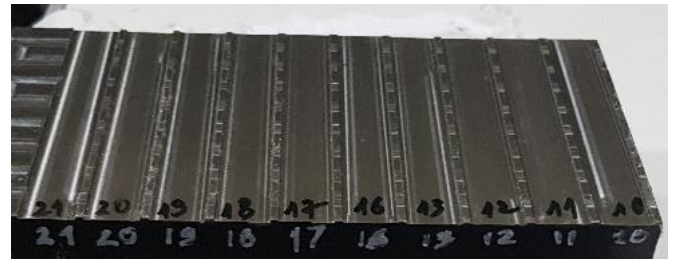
Finished workpiece Inconel-800 machined with nanofluid MQL
